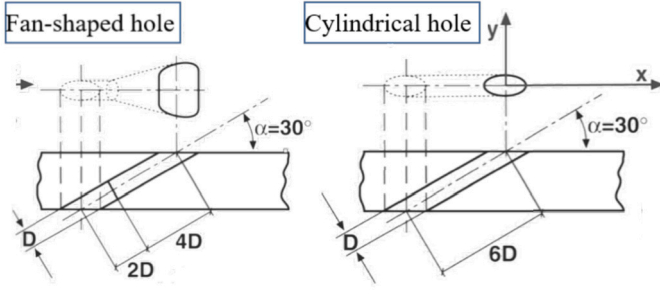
The geometry of film cooling holes [7]: left (a) fan-shaped hole, right (b) cylindrical hole.
